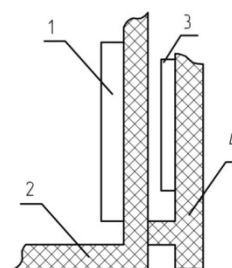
The mutual location of the control unit of the milking machine and transponder: 1) the reader; 2) the housing of the control unit of the milking machine; 3) the transponder; 4) the housing of transponder mounting
